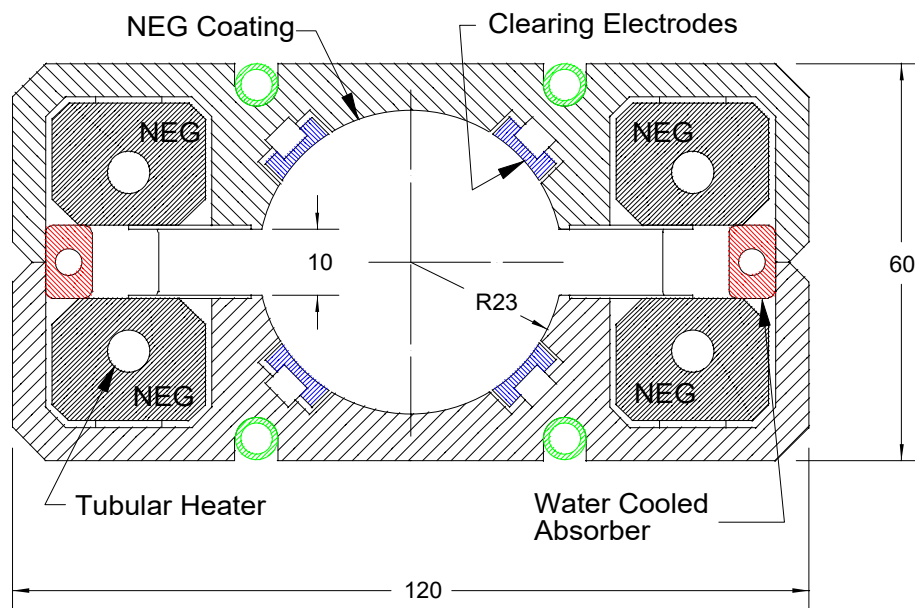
ILC damping ring wiggler chamber; dimensions in mm.
